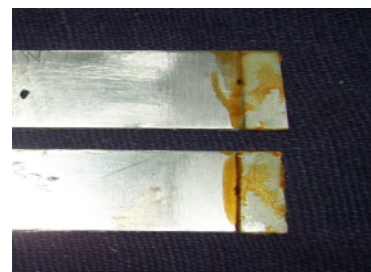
Shows the fracture surface of the adhesive joint (cured at 120°C for 60 min, surface prepared with 220 emery grade paper)
